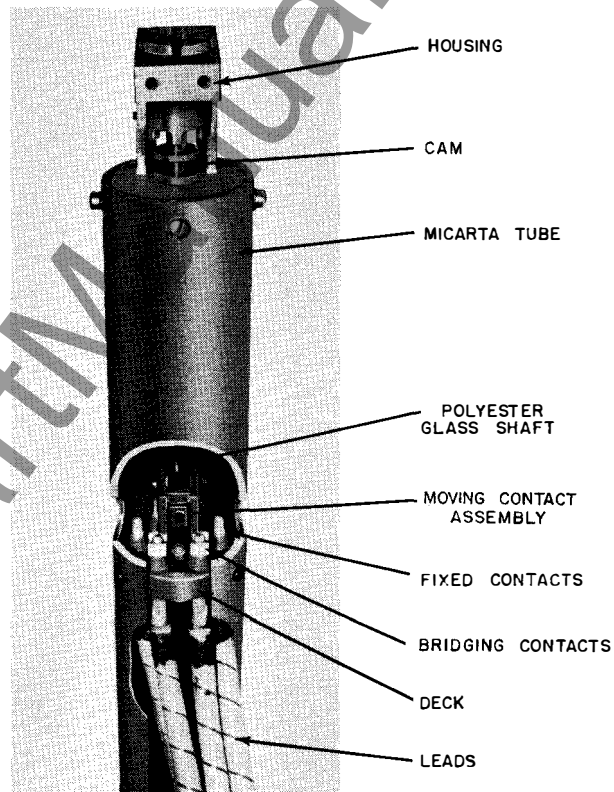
Cutaway View of Single Deck, WSB-1 Tap Changer
